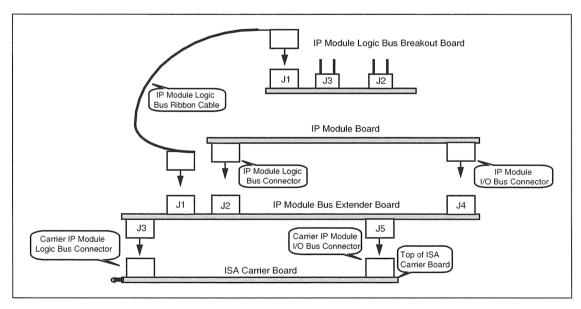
IPLBB/IPLBE Assembly Diagram for an ISA Carrier Board
